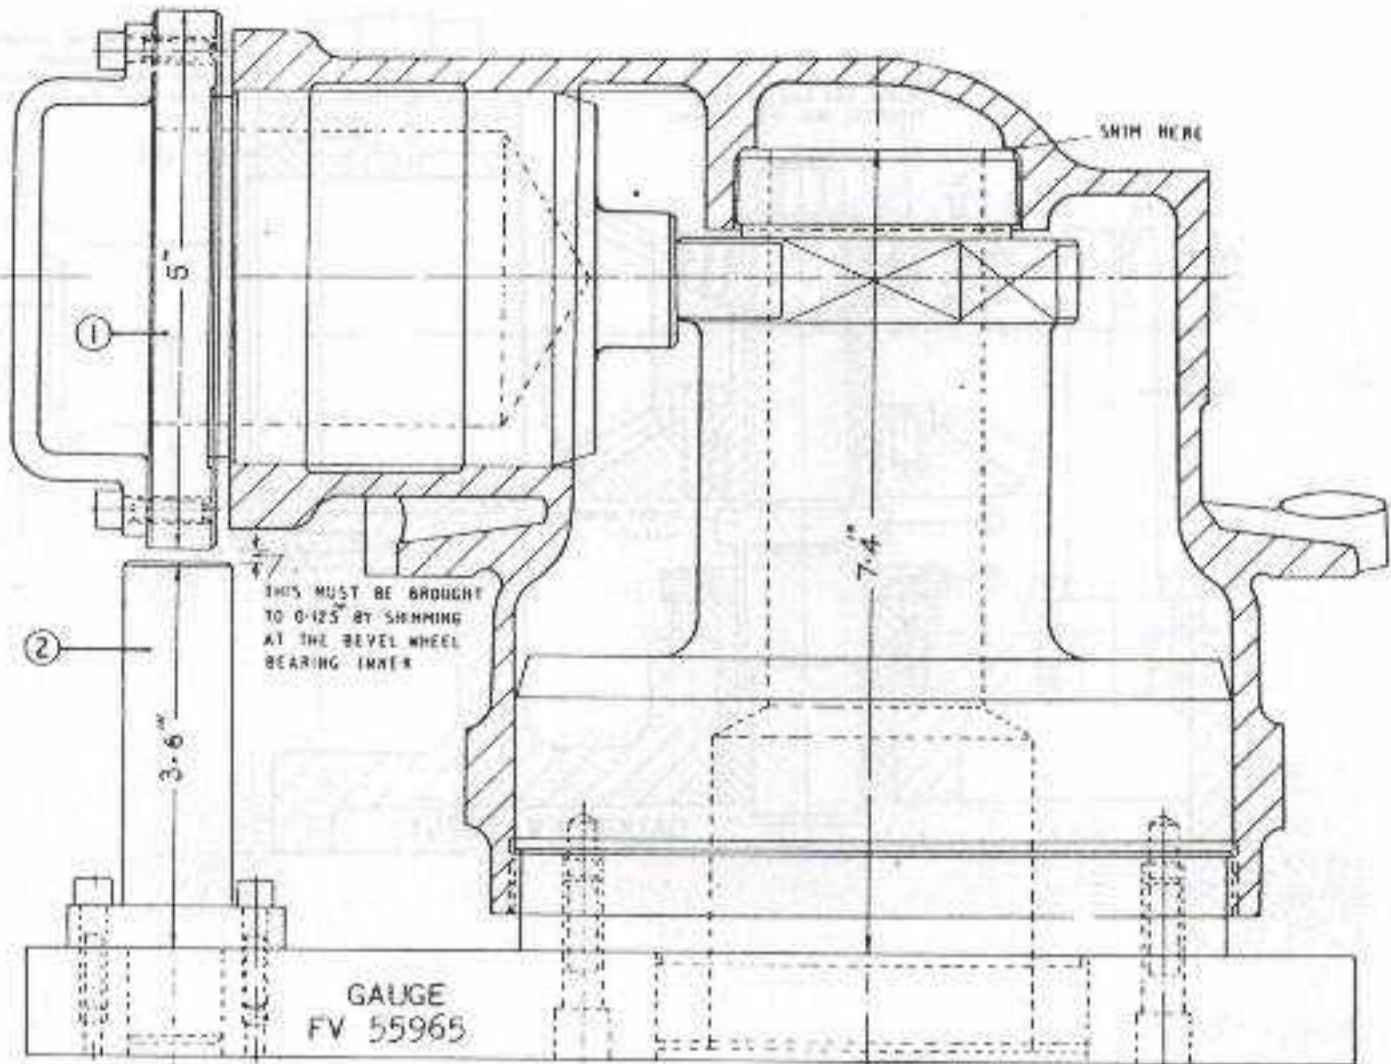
BEVEL BOX - FIXTURE FOR GAUGING THE AMOUNT OF SHIMMING REQUIRED UNDER THE BEVEL WHEEL HUB INNER, ROLLER BEARING
